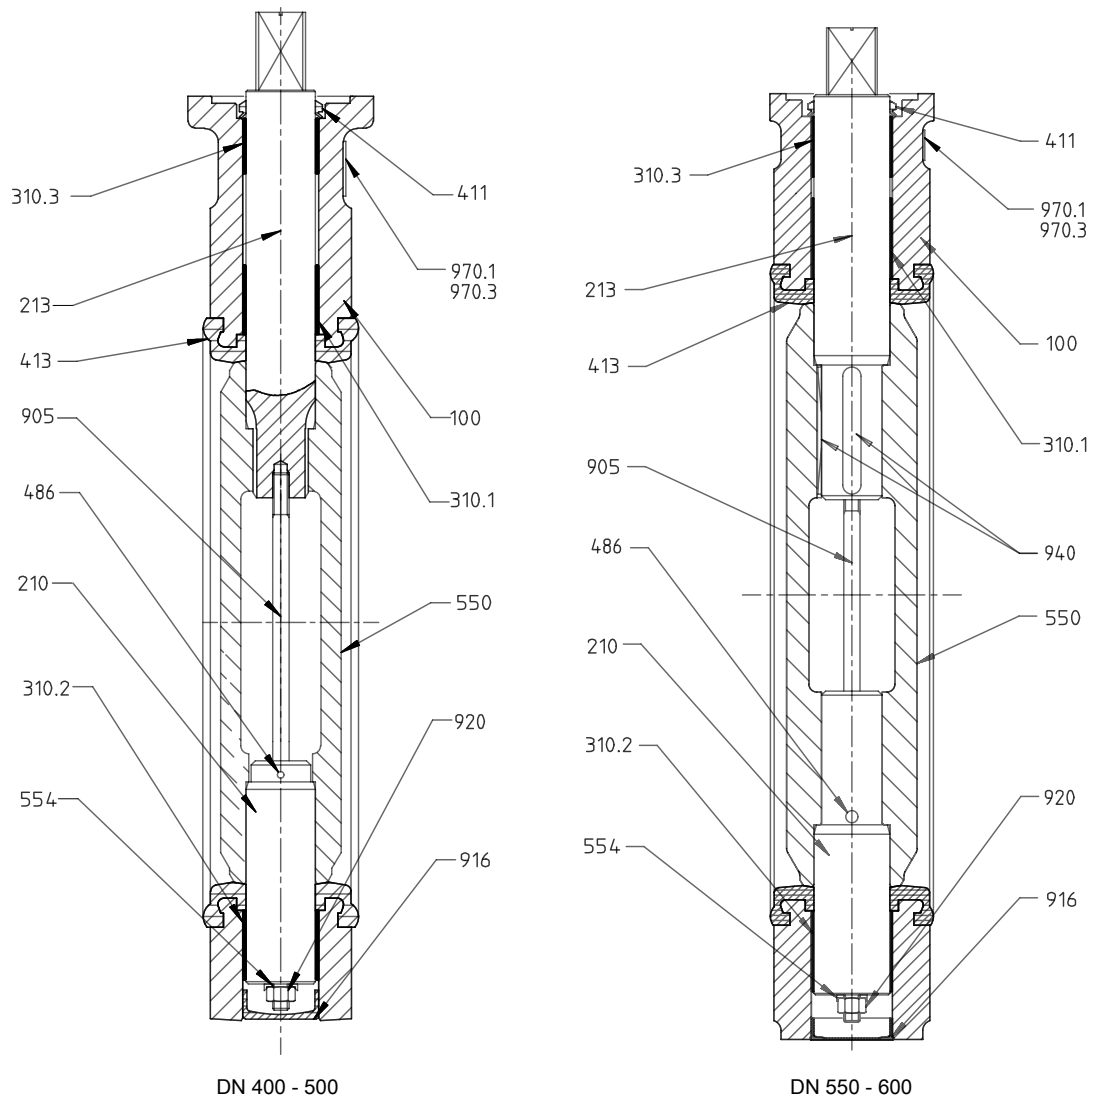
Sectional drawings of ISORIA 20/25 DN 400 - 600
